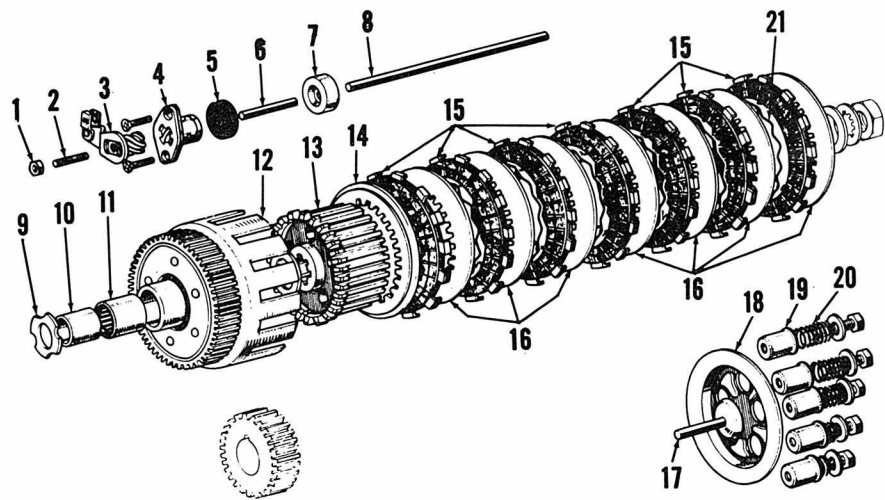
Exploded view of clutch assembly used. Expander rings (21) are installed with friction discs (15) between steel plates (16).
